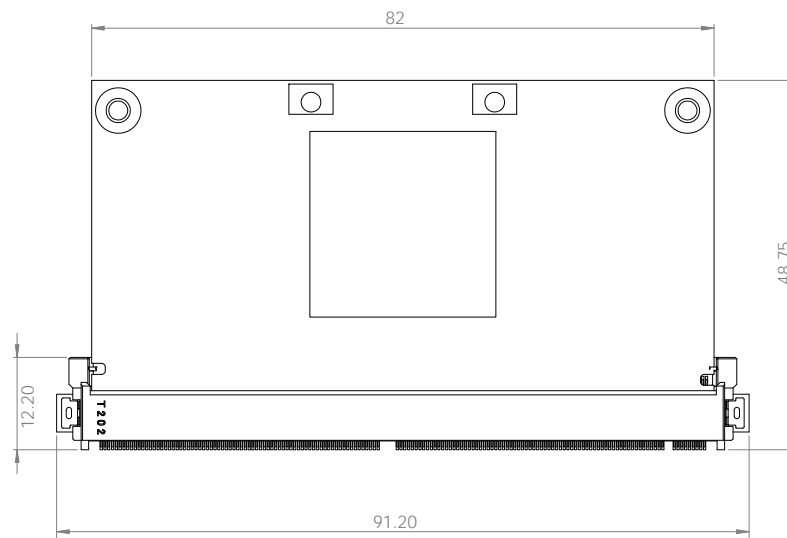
Minimum carrier board space requirement (dimensions in mm)
